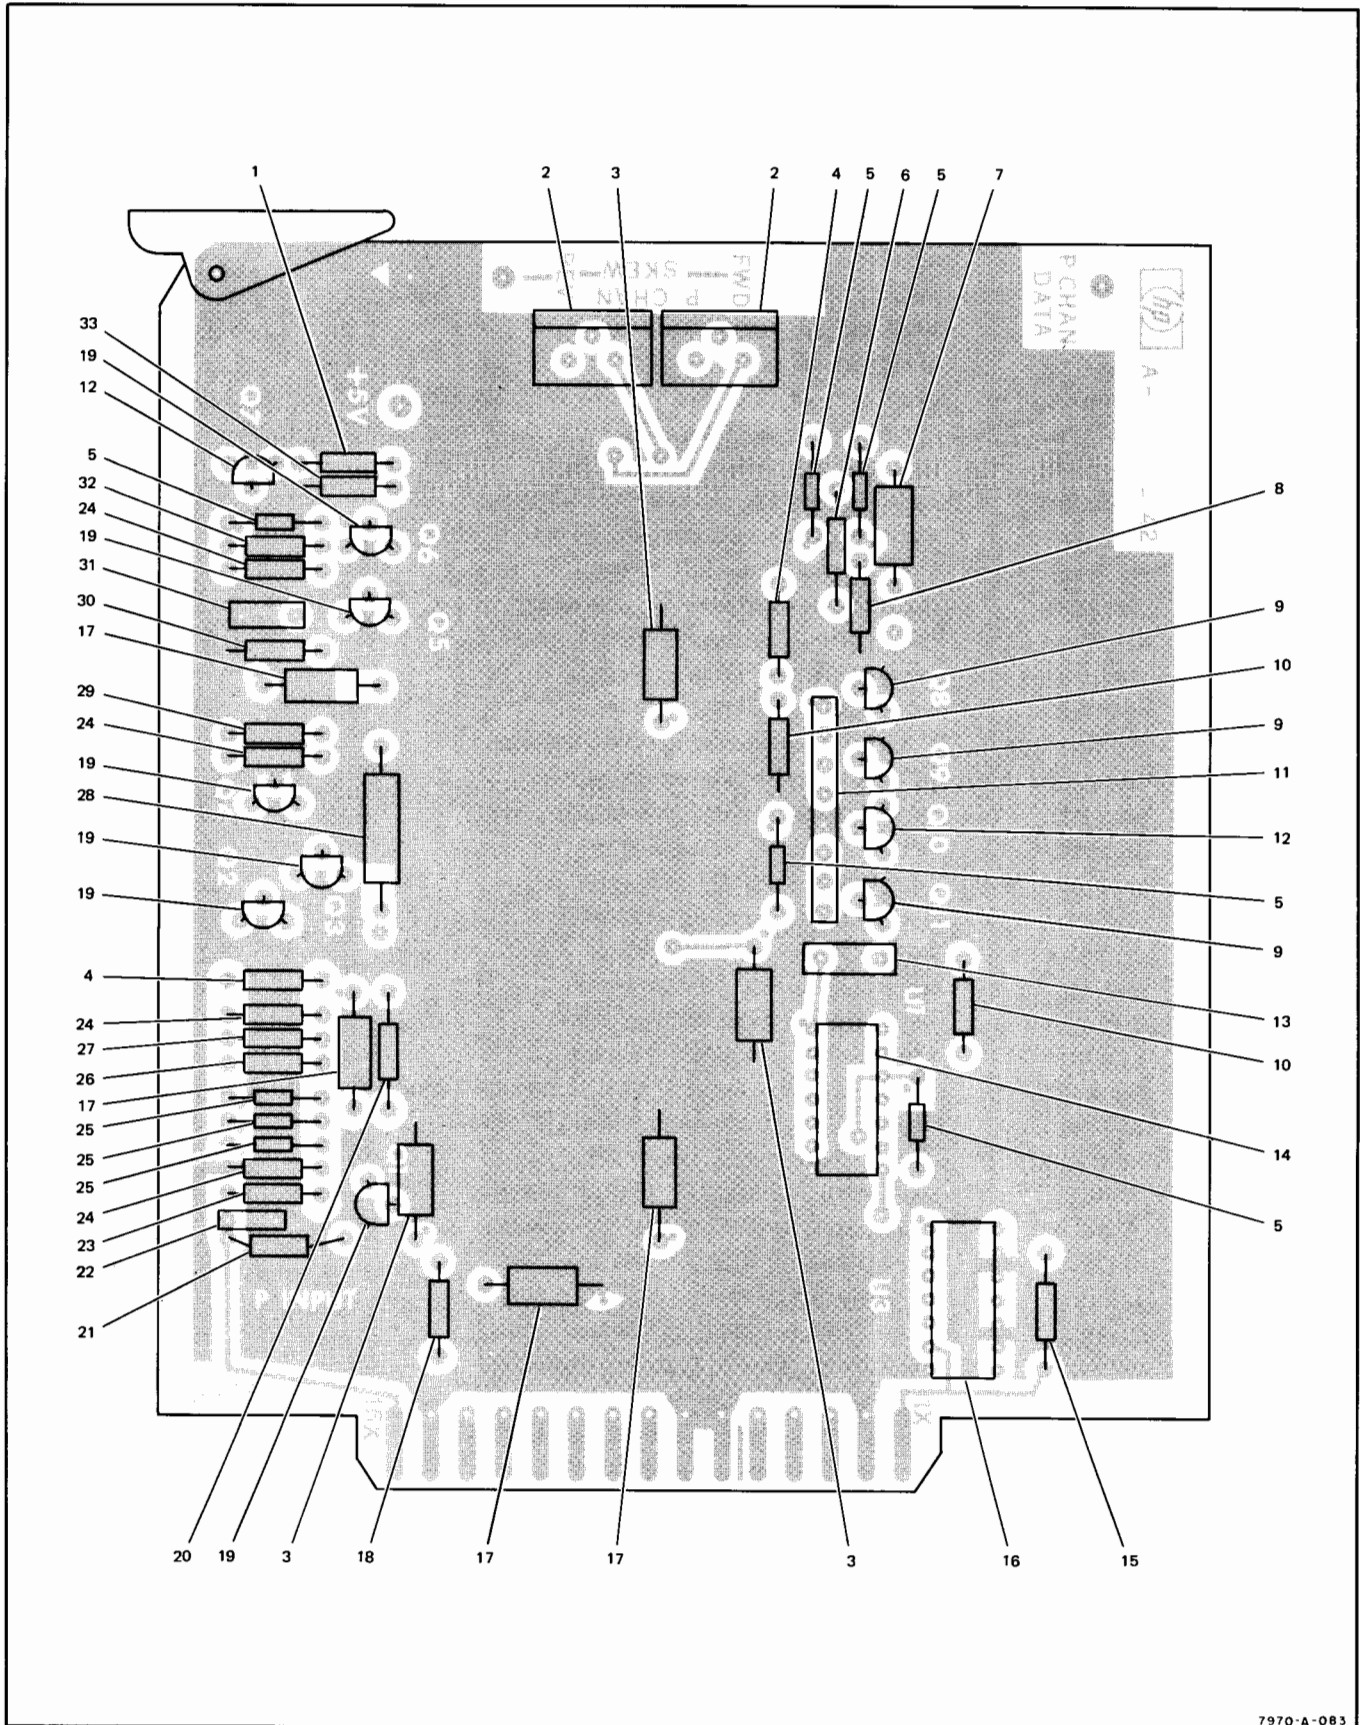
Single-Channel Read Data PC Assembly A18A2, Parts Location Diagram
